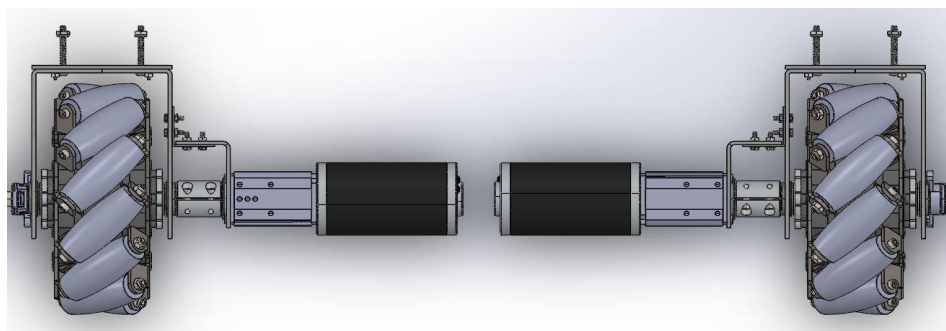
Final motor assembly design from February 2021. From left to right: encoder, wheel assembly, hex shaft coupler, gearbox, brushed DC motor
